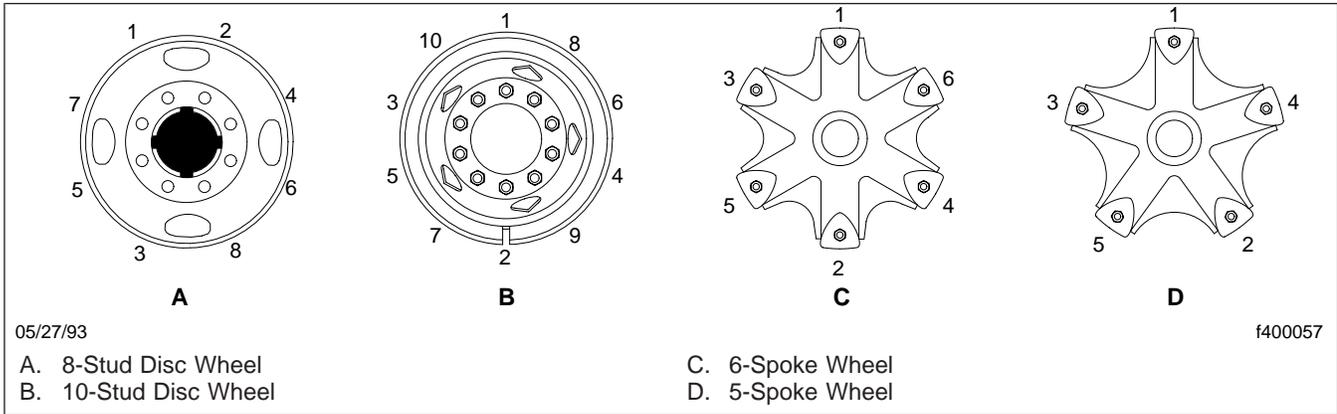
, Wheel Nut and Rim Nut Tightening Sequence
